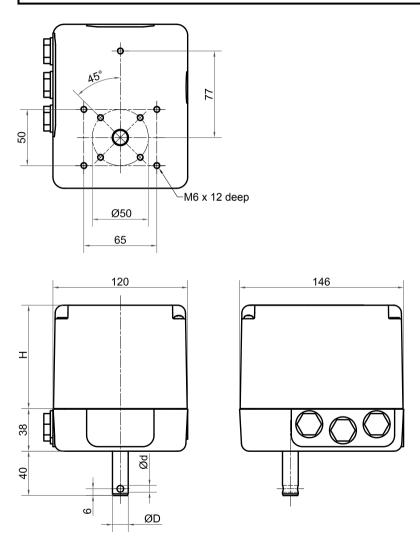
Series N1 to N4 A – assembly dimensions
